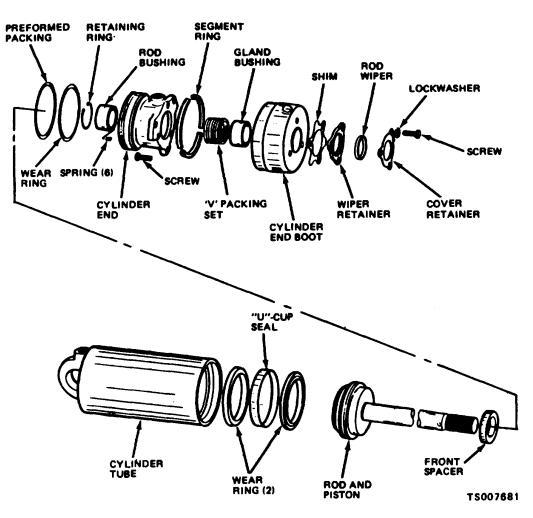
Tilt Cylinder, Disassembly and Reassembly
